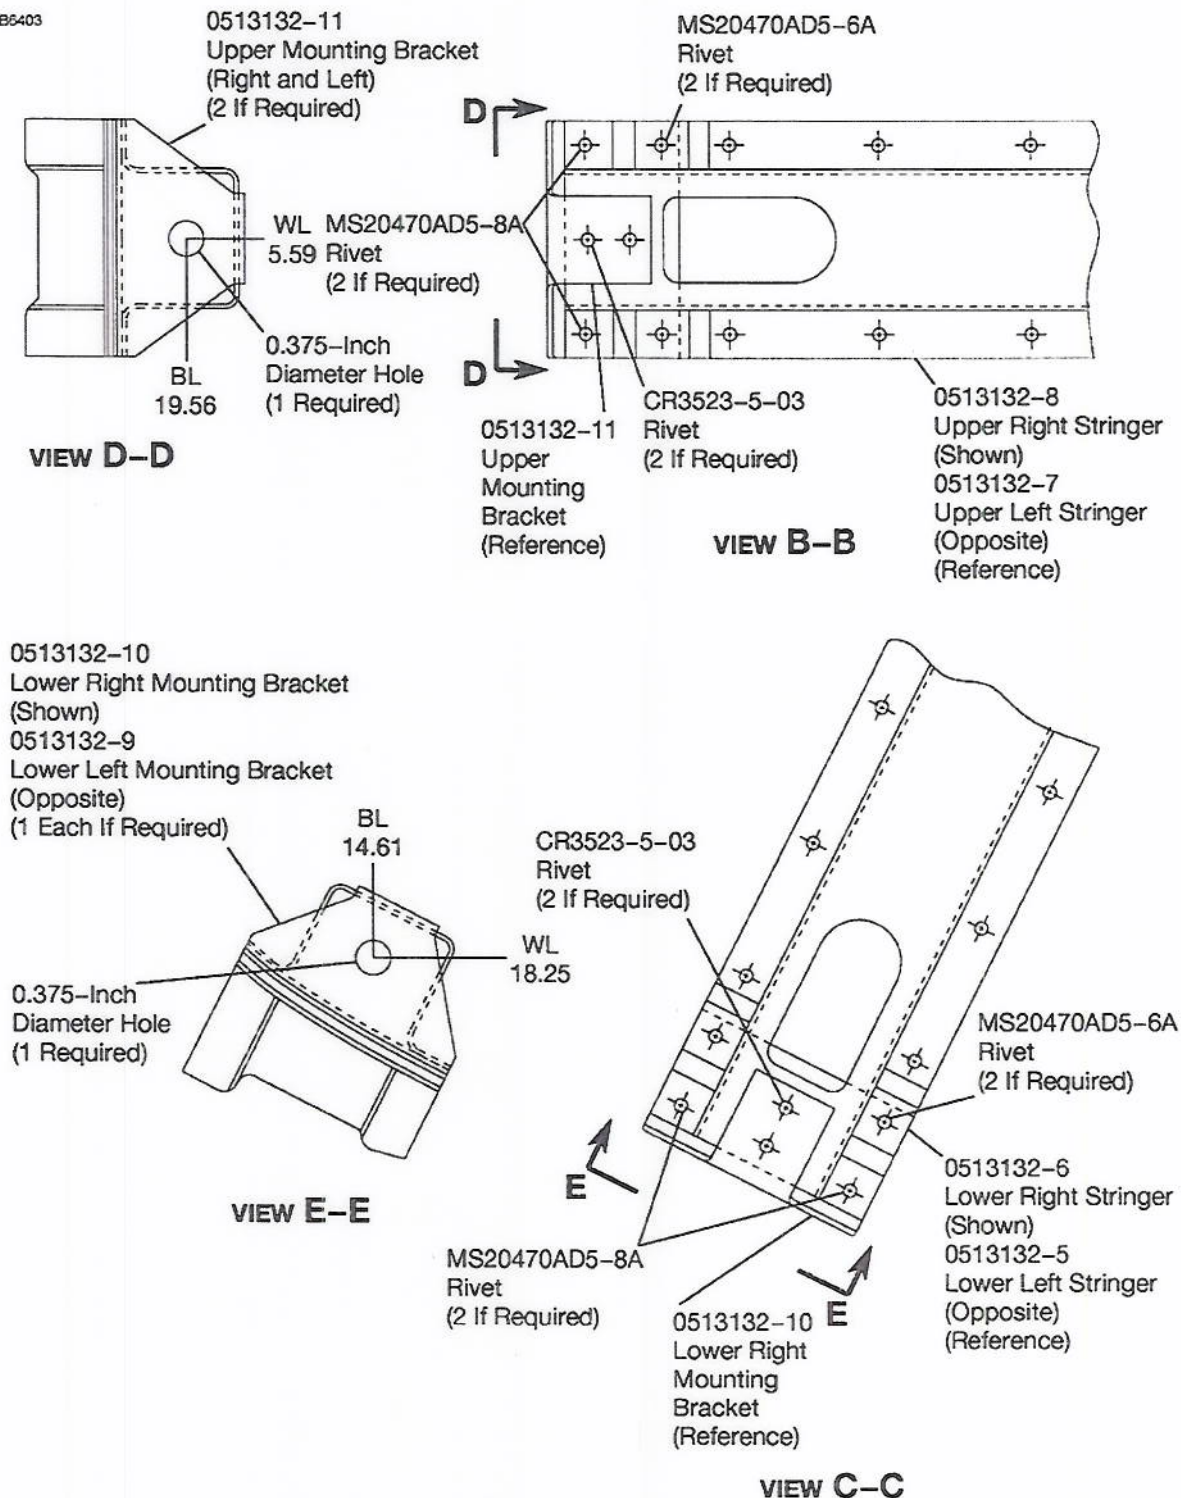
Engine Mount Bracket Inspection (Sheet 3)
